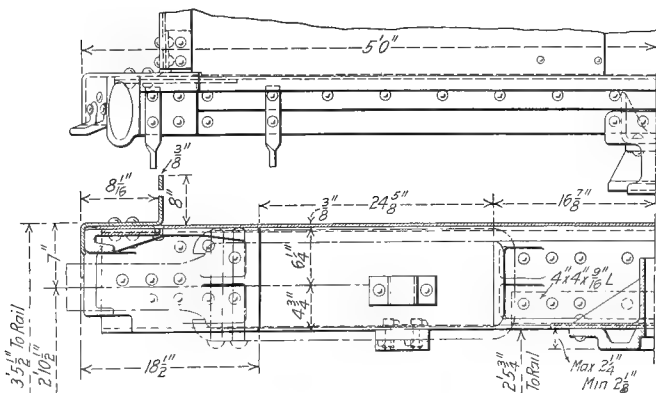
Structural Details of Pennsylvania Railroad Steel Box Car. See also Figs. 7 and 262-264.
